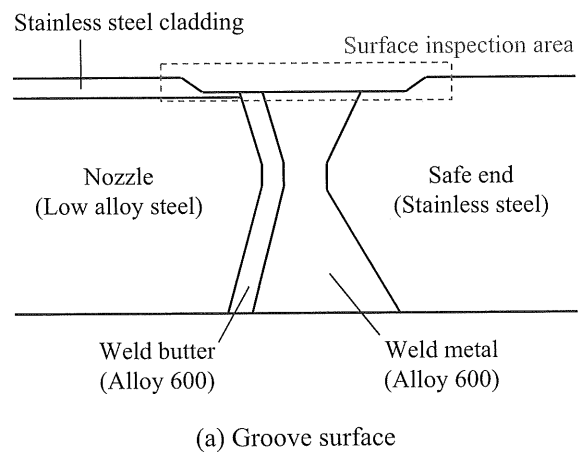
Schematic of dissimilar weld between reactor vessel and safe end
